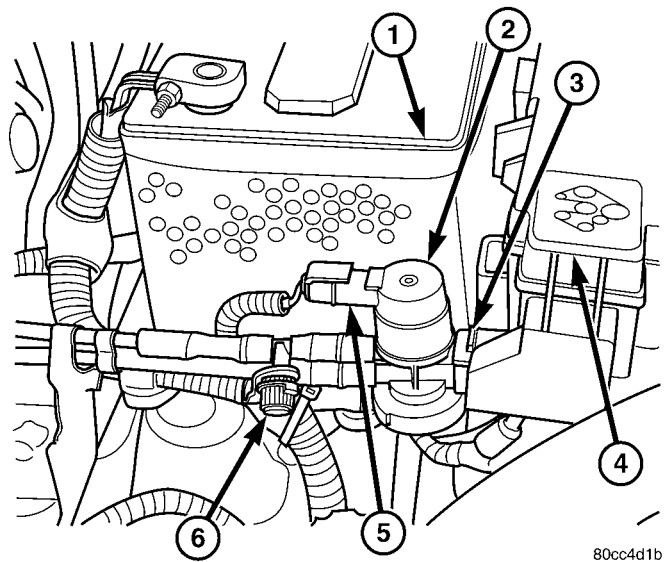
EVAP / PURGE SOLENOID LOCATION
